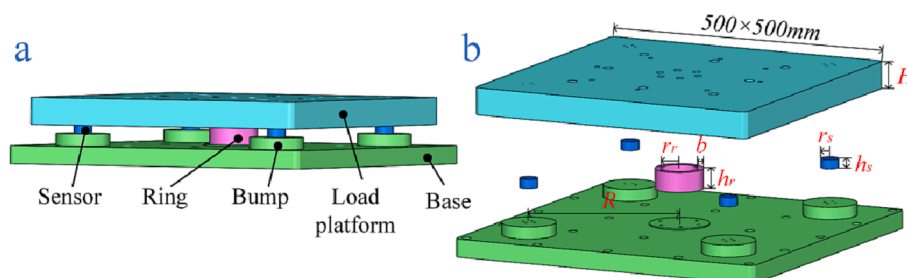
The model of the load sharing measuring platform: (a) front view; (b) exploded view.
